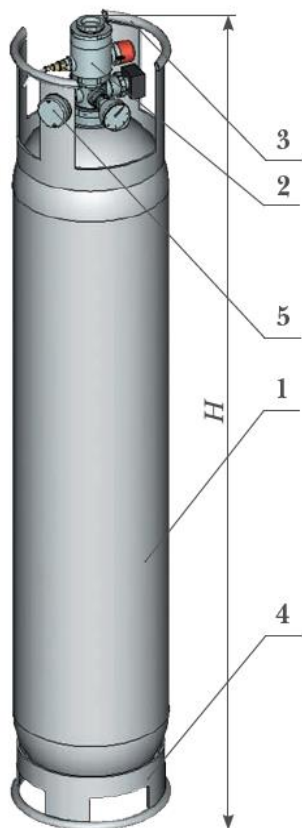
Overall view of a module with one release device with a burst disk (for one direction)
